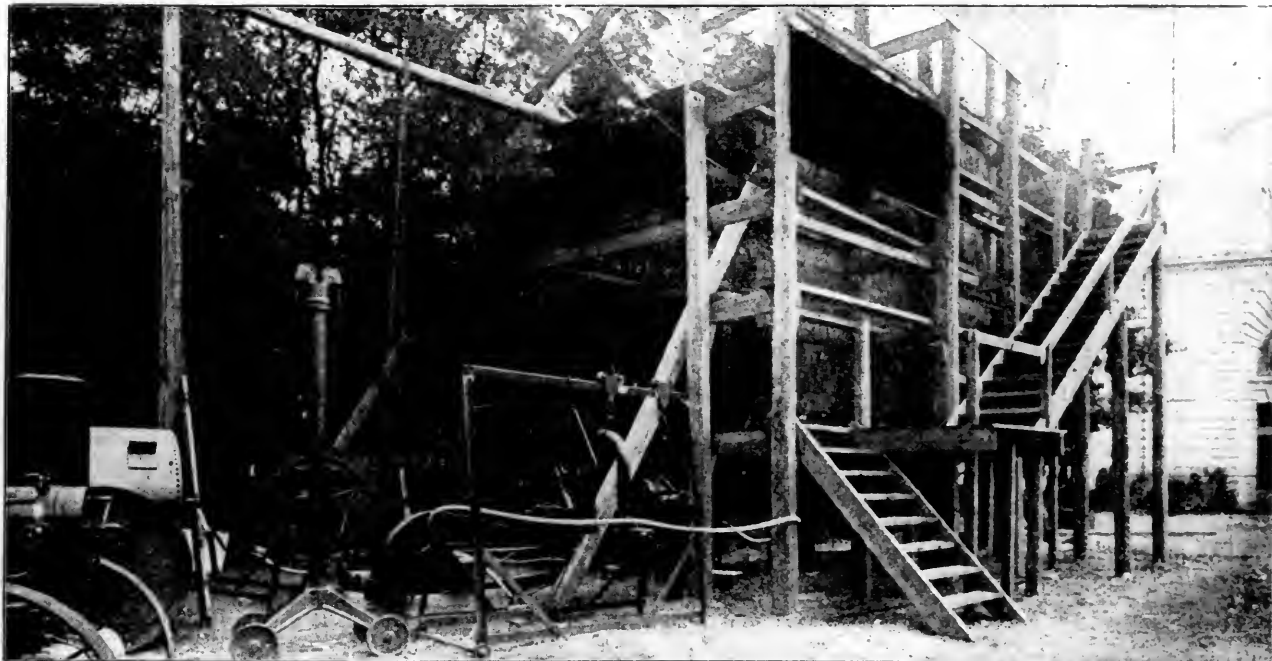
Full Size Section of a Steel Ship, Illustrating Use of Pneumatic Tools. Exhibit of Chicago Pneumatic Tool Company, Paris Exposition.
